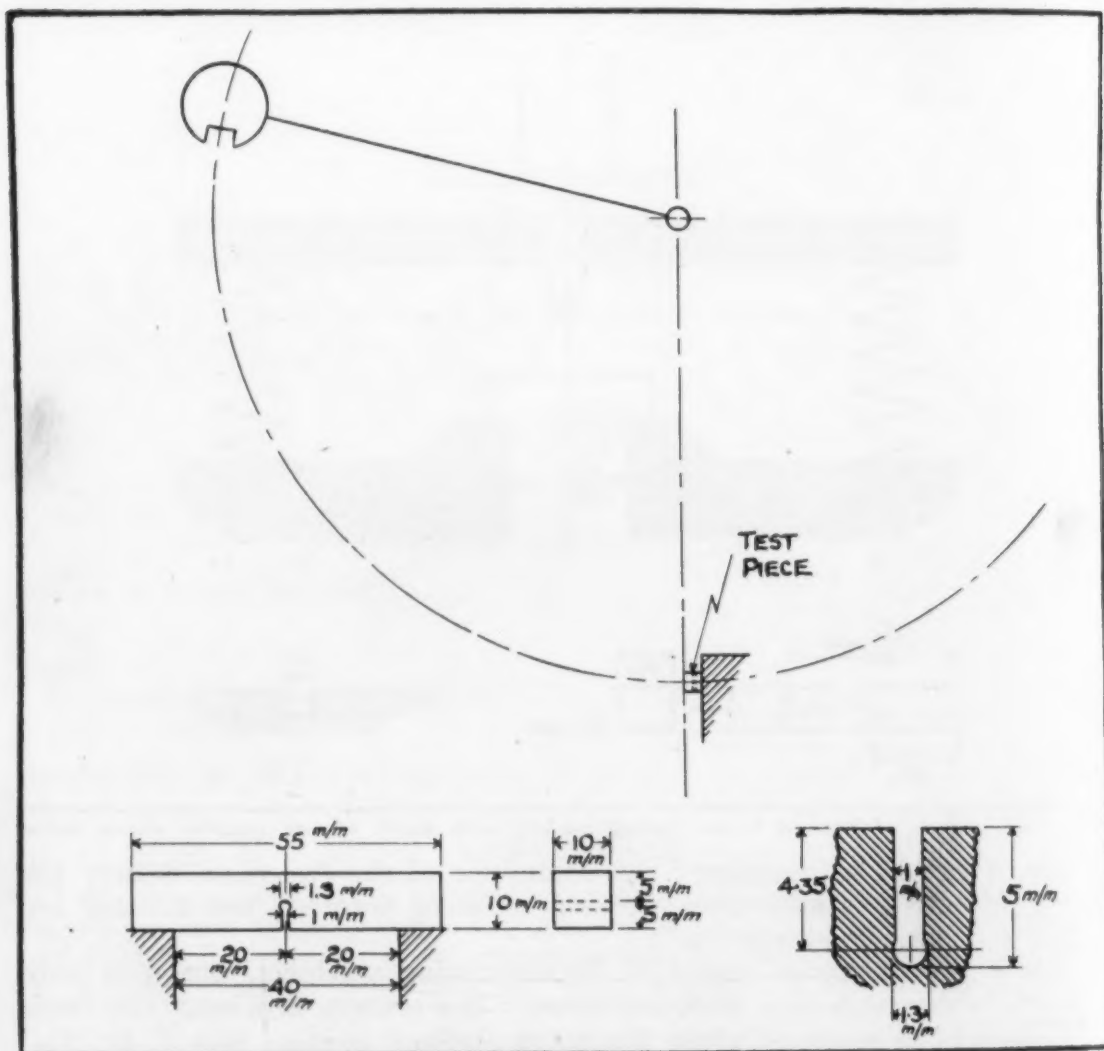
Arrangement of Charpy impact testing machine with sketch of test specimen shown below
